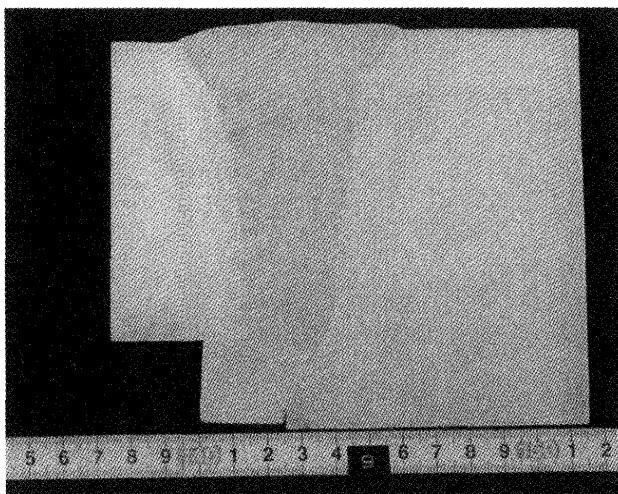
Weld bead section for 90mm plate thickness.
